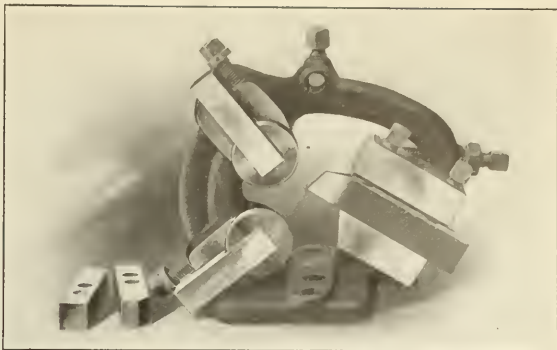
Standard Type of Turner for Use on Gridley Automatic Turret Lathe
